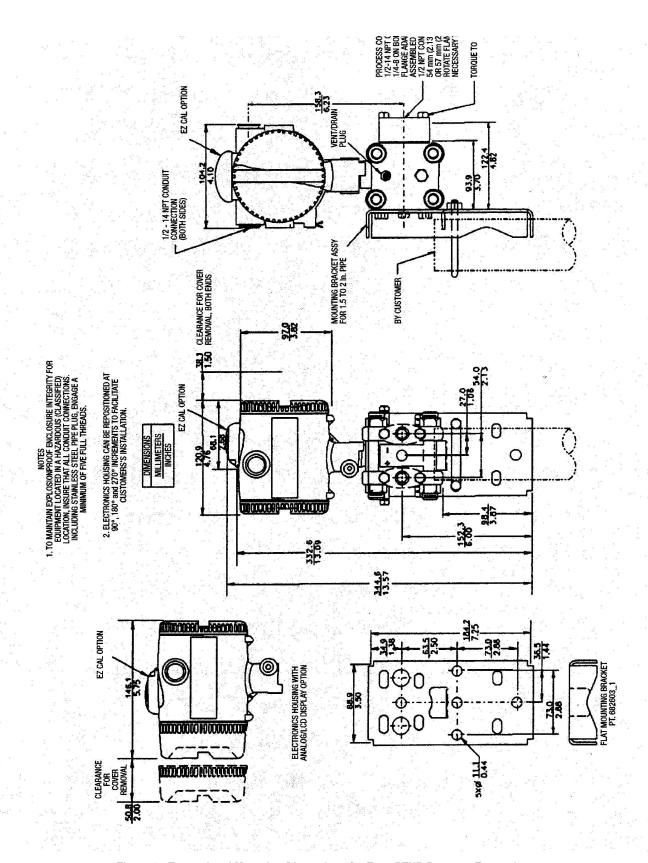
External and Mounting Dimensions for Type PTHP Pressure Transmitter
